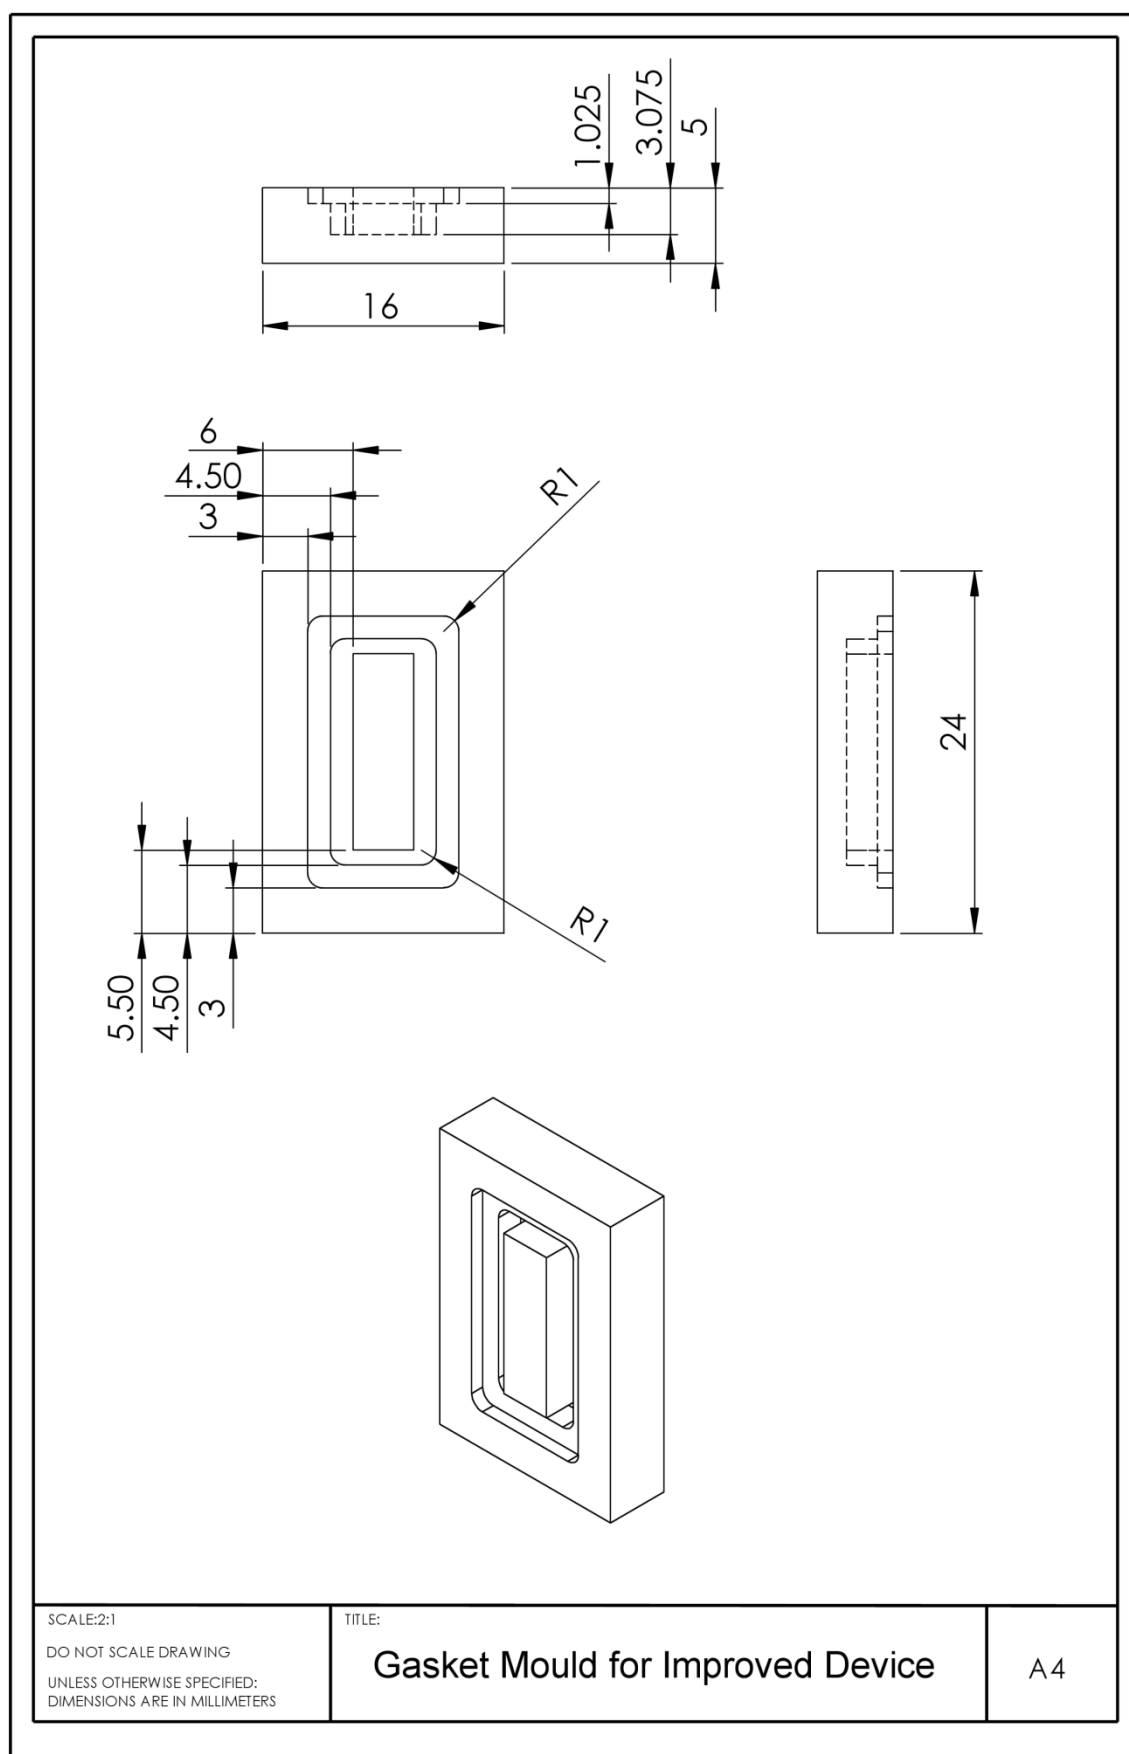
Technical drawing of gasket mould for improved culture device.
